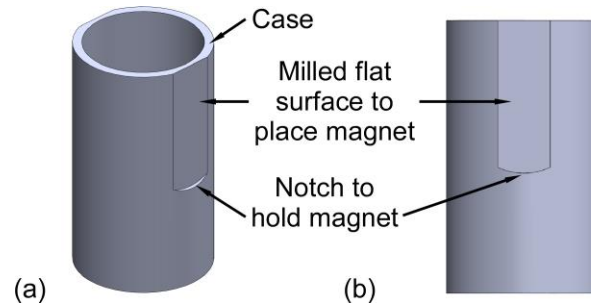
Case in Design P.MF.1. Flat surfaces and end notches are machined to hold magnets.
